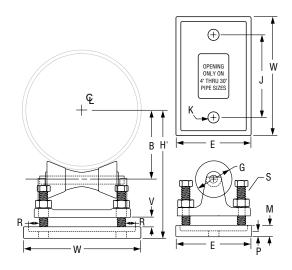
, 275, 274P: DIMENSIONS (IN)
